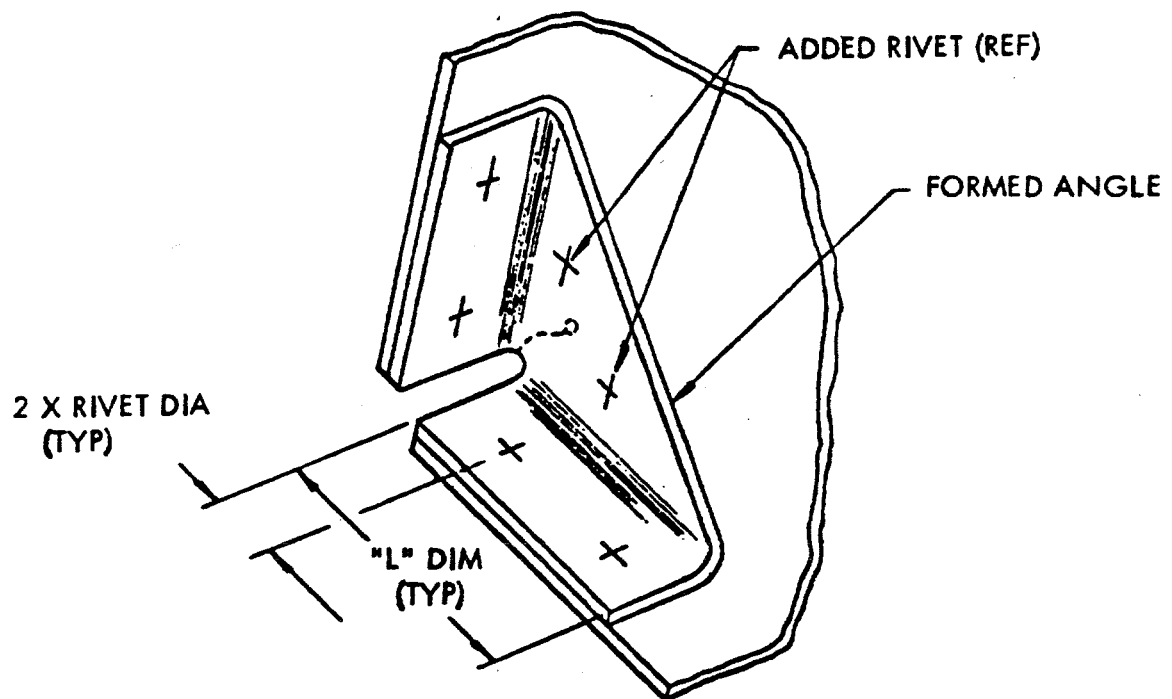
MAJOR CORNER CRACKS IN DOUBLE-FORMED FLANGE
